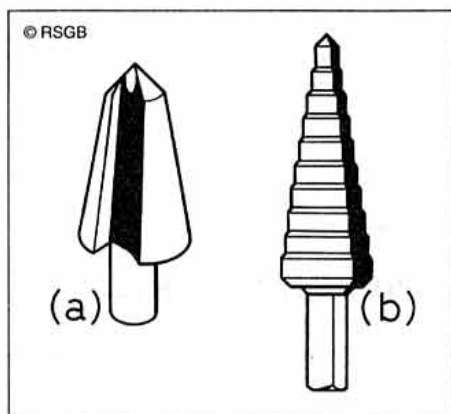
Cone-cut drills or step drills are more versatile than punches, but difficult to handle without a drilling machine.
